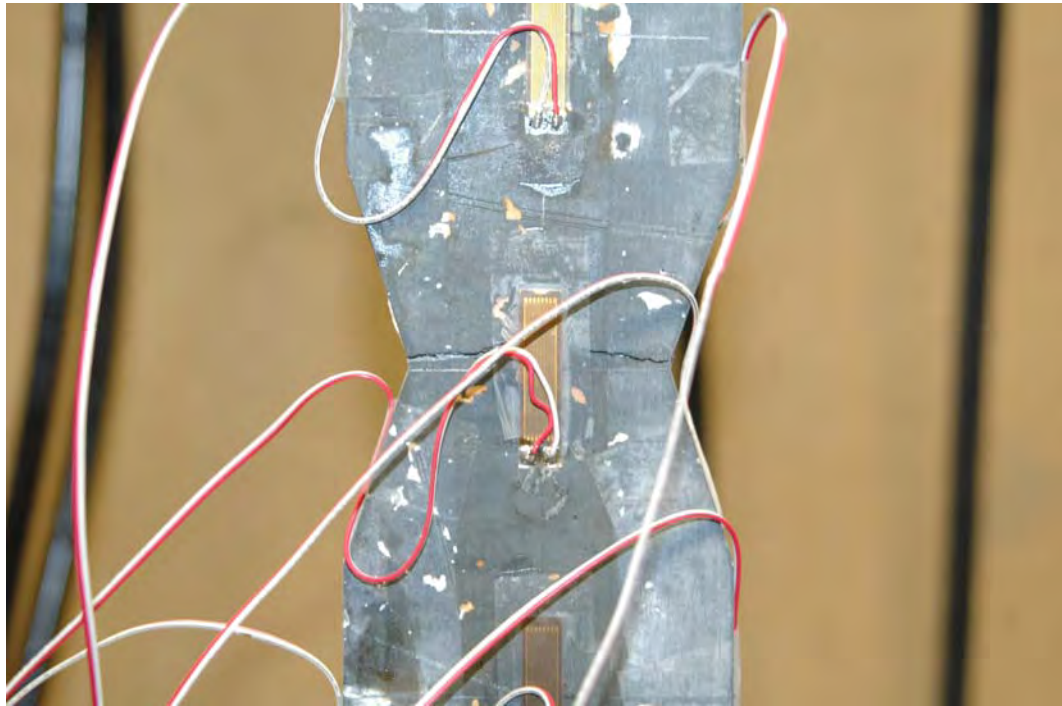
Tension Test 1, cracked specimen at test completion.
